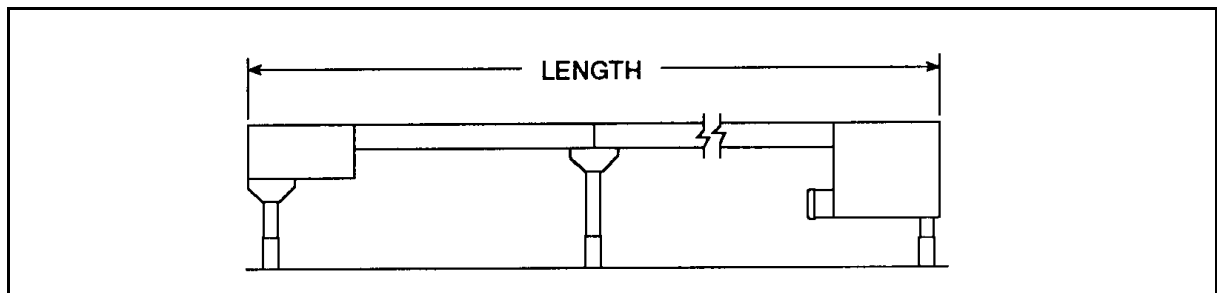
Straight T/C Conveyor Style 1 (shown)
